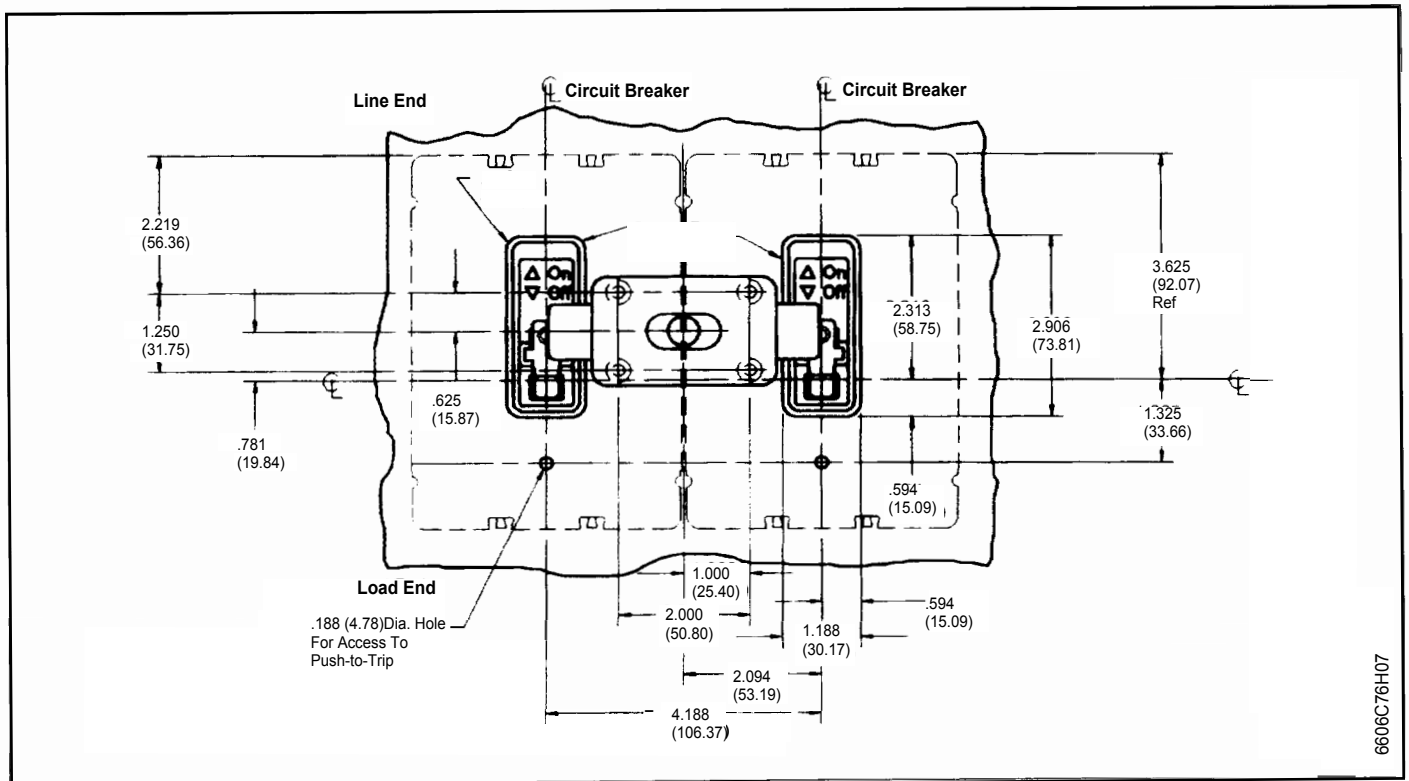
F-Frame Sliding Bar Interlock Installation Details.
